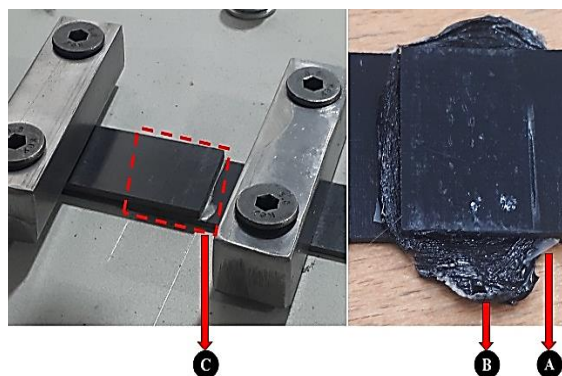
The view of the welding area and sample 2F before and after welding, A) a part of the interface film after welding, B) polymer and fiber protrusion, C) the welding area of sample 2F before welding
